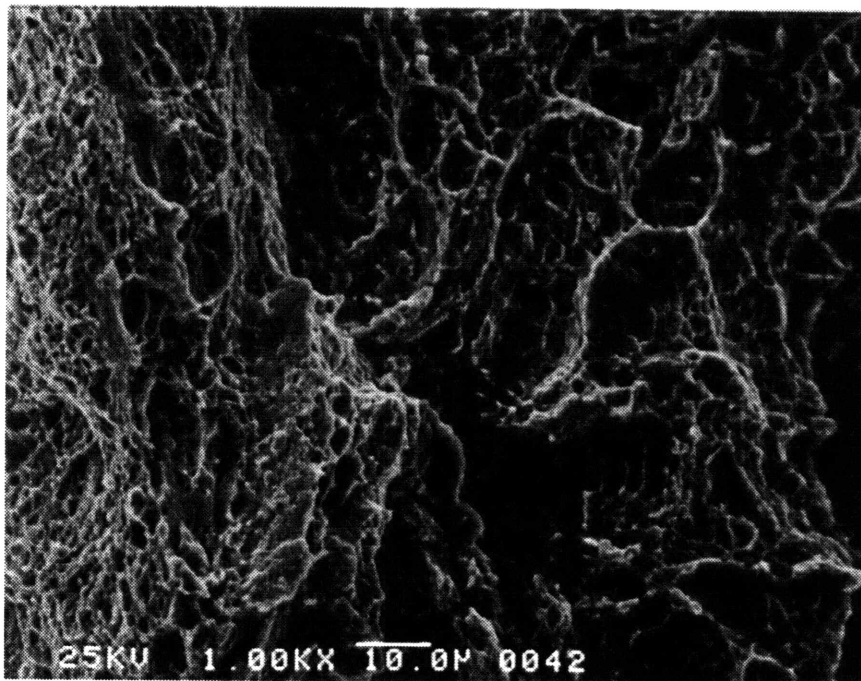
Tough, Fibrous Fracture Outside of PAGB Facets on 1350°C Air-
